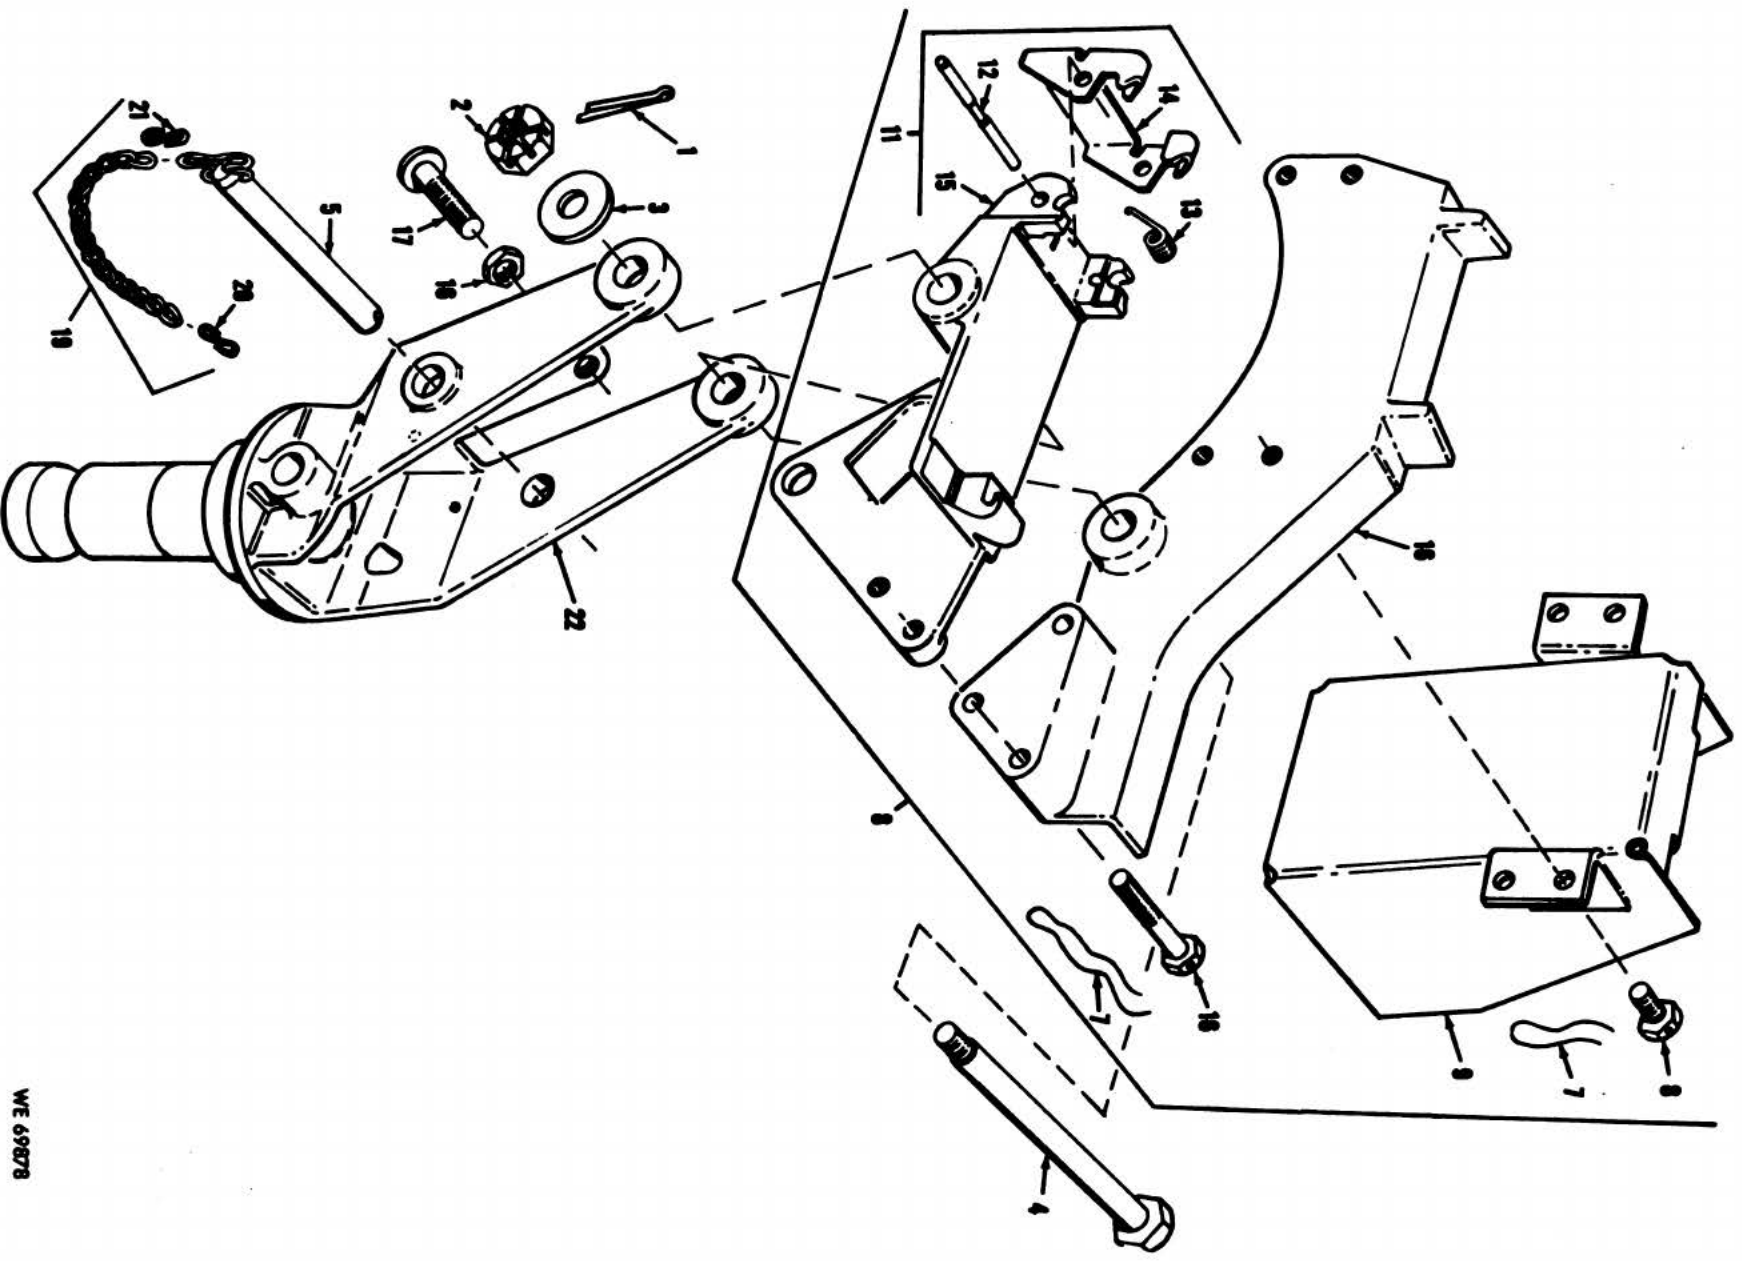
Mowat, machine gun—11589556—partially exploded view.
